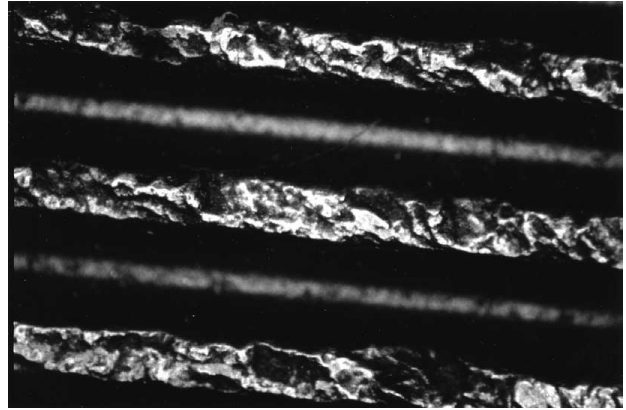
Macro-scale image of spalled thread crests on D2 tool steel (Gagg, 2005).
